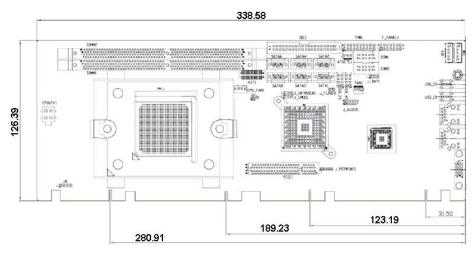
SPCIE-3600AM2 Dimensions (mm)
